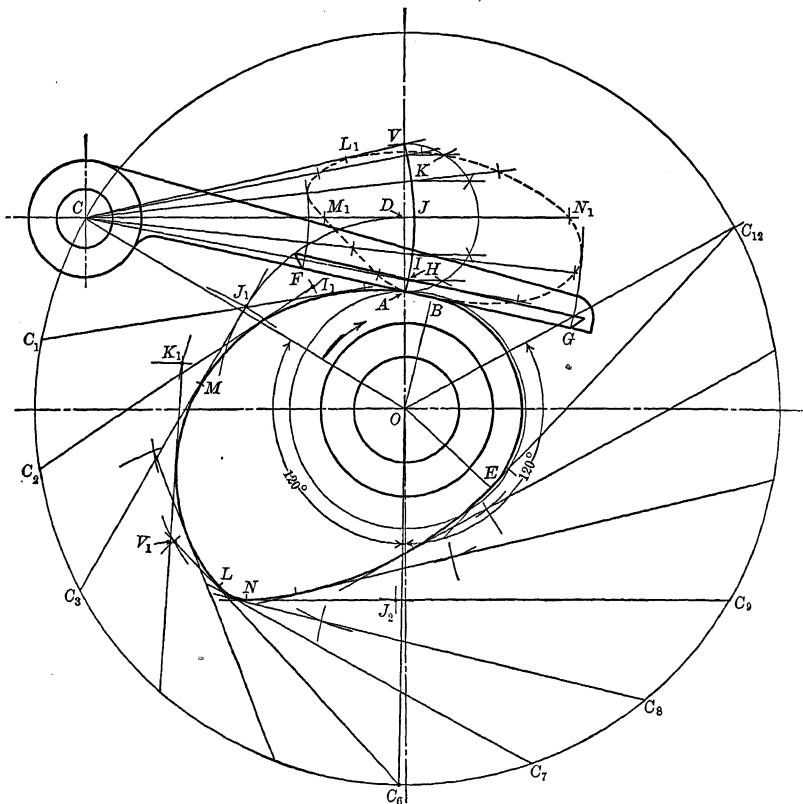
PROBLEM 11, CAM WITH SWINGING FOLLOWER ARM, SLIDING CONTACT
